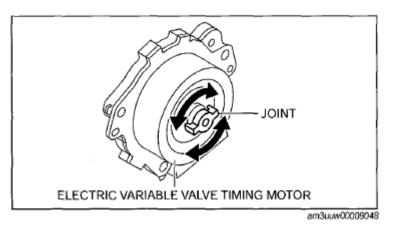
Rotating Electric Variable Valve Timing Motor Joint
